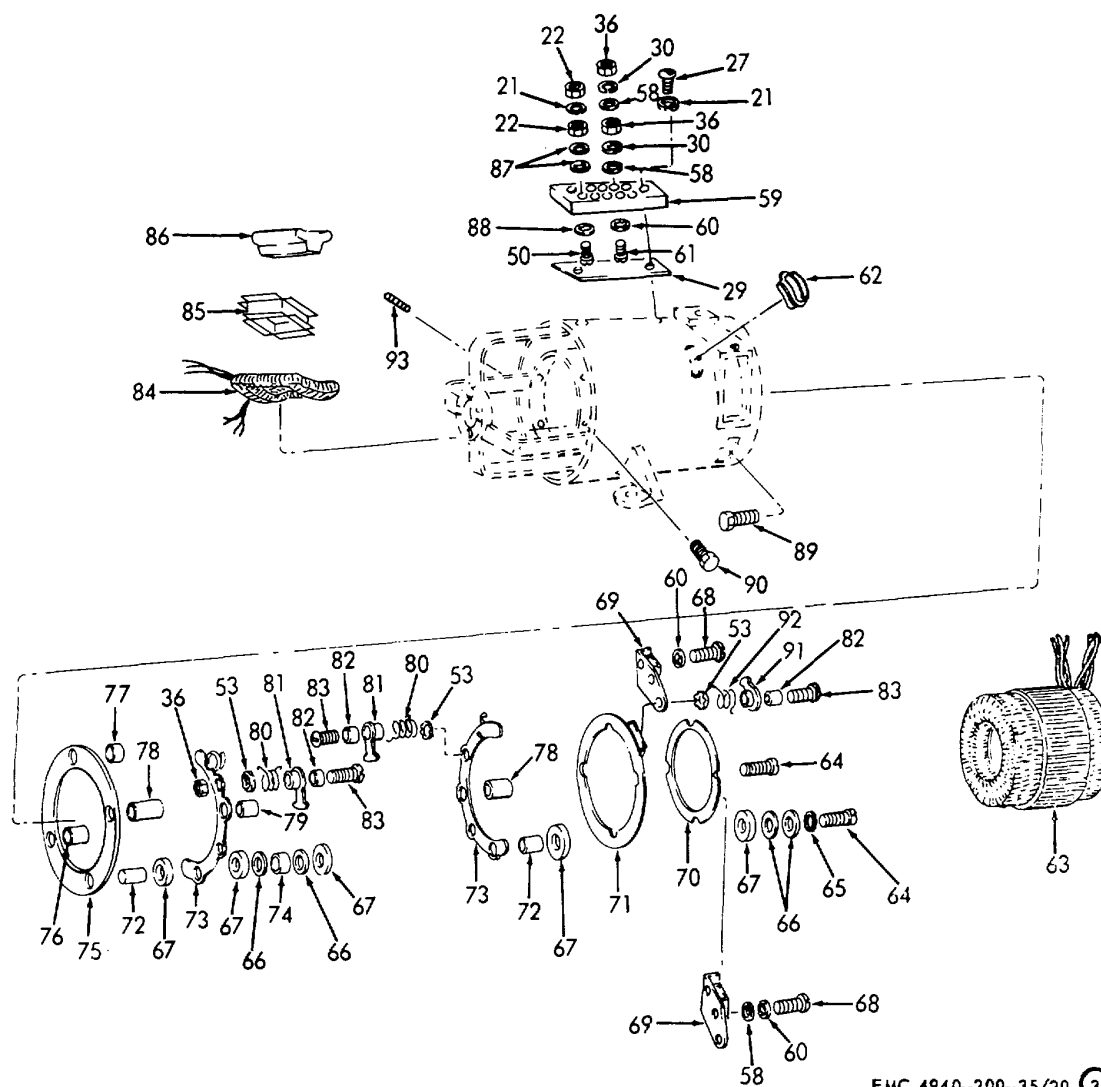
Generator-welder, disassembly and reassembly.
